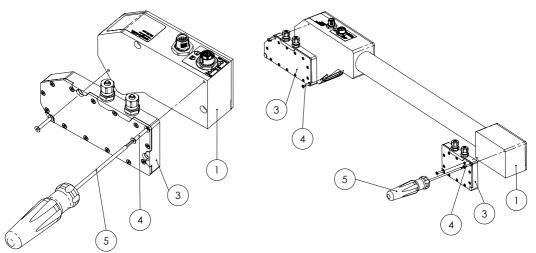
Assembly of the cooling unit of weCat3D MLWLxxx
